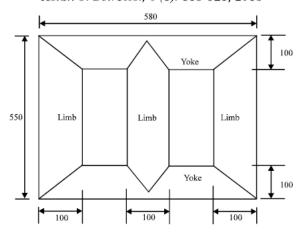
Dimension (mm) of 100 kVA transformer core model
